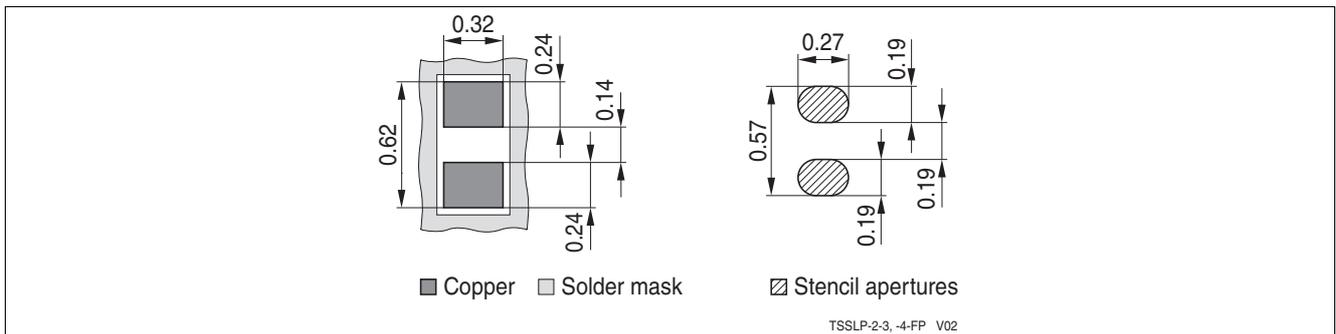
TSSLP-2-3: Footprint (dimension in mm)
